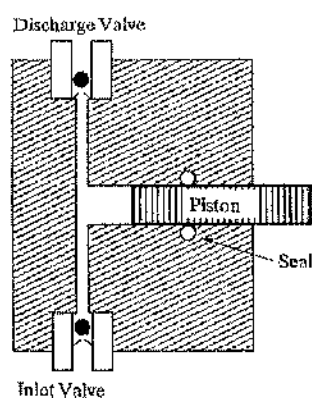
<sup>103</sup> A single piston reciprocating pump.
